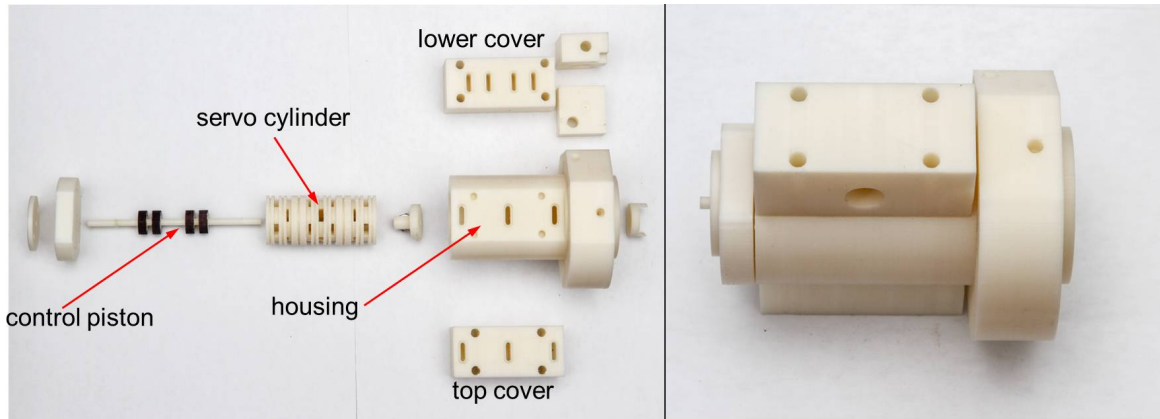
RP components of the control unit (left); assembled parts (right)
